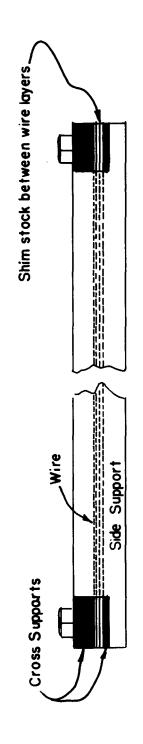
Sketch of Side View of Welding Assembly Without Buffer System.
